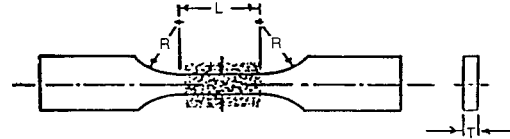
Specimens With Tangentially Blending Fillets Between the Uniform Test Section and the Ends for Axial Loading
